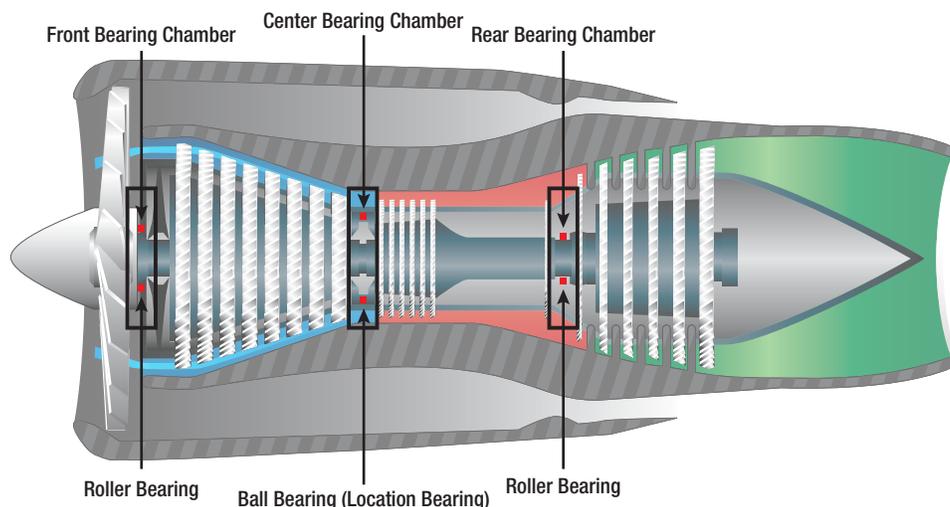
Bearing locations on a typical turbine engine, forward and aft of the compressor, and forward of the turbine section.
